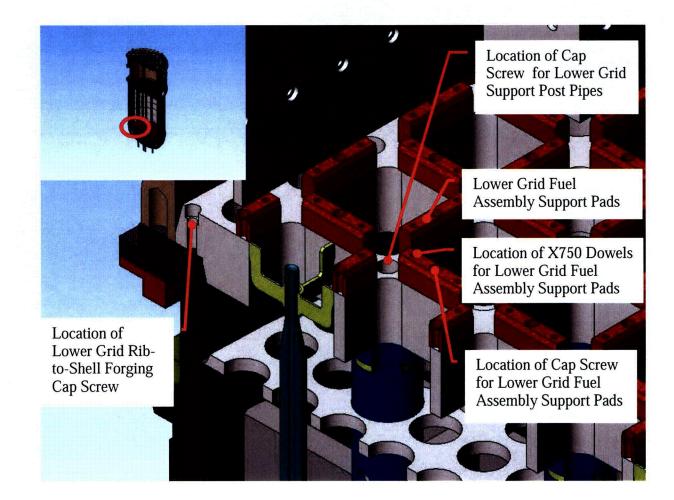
Typical lower grid assembly and fuel assembly support pads for B&W-designed PWRs
